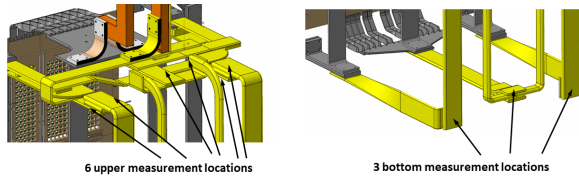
Zoom view of the CAD model indicating the six top (left) and three bottom (right) measurement locations.
